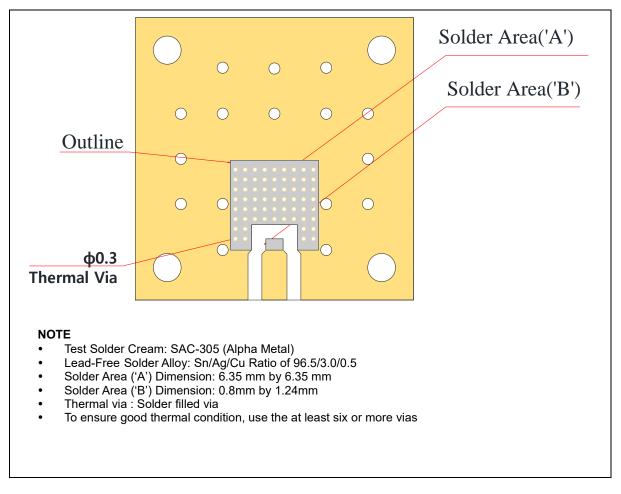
Recommended PCB Layout and Solder Mask Pattern
